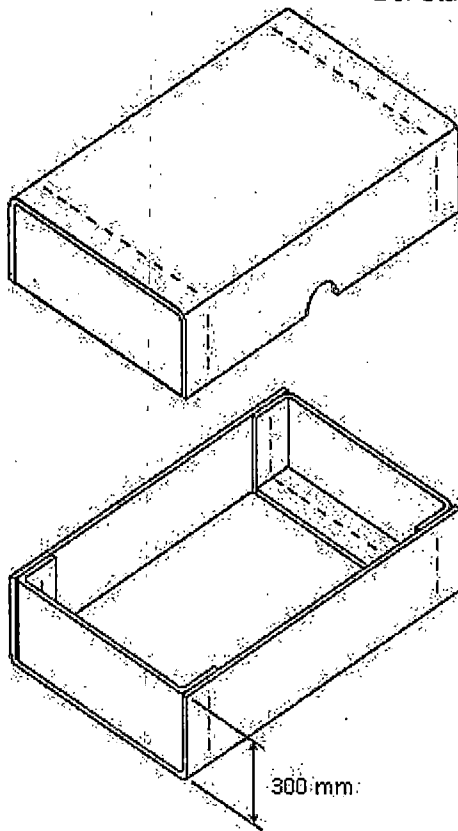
Def Stan 81-015, A; Style "C" Box, Rigid
